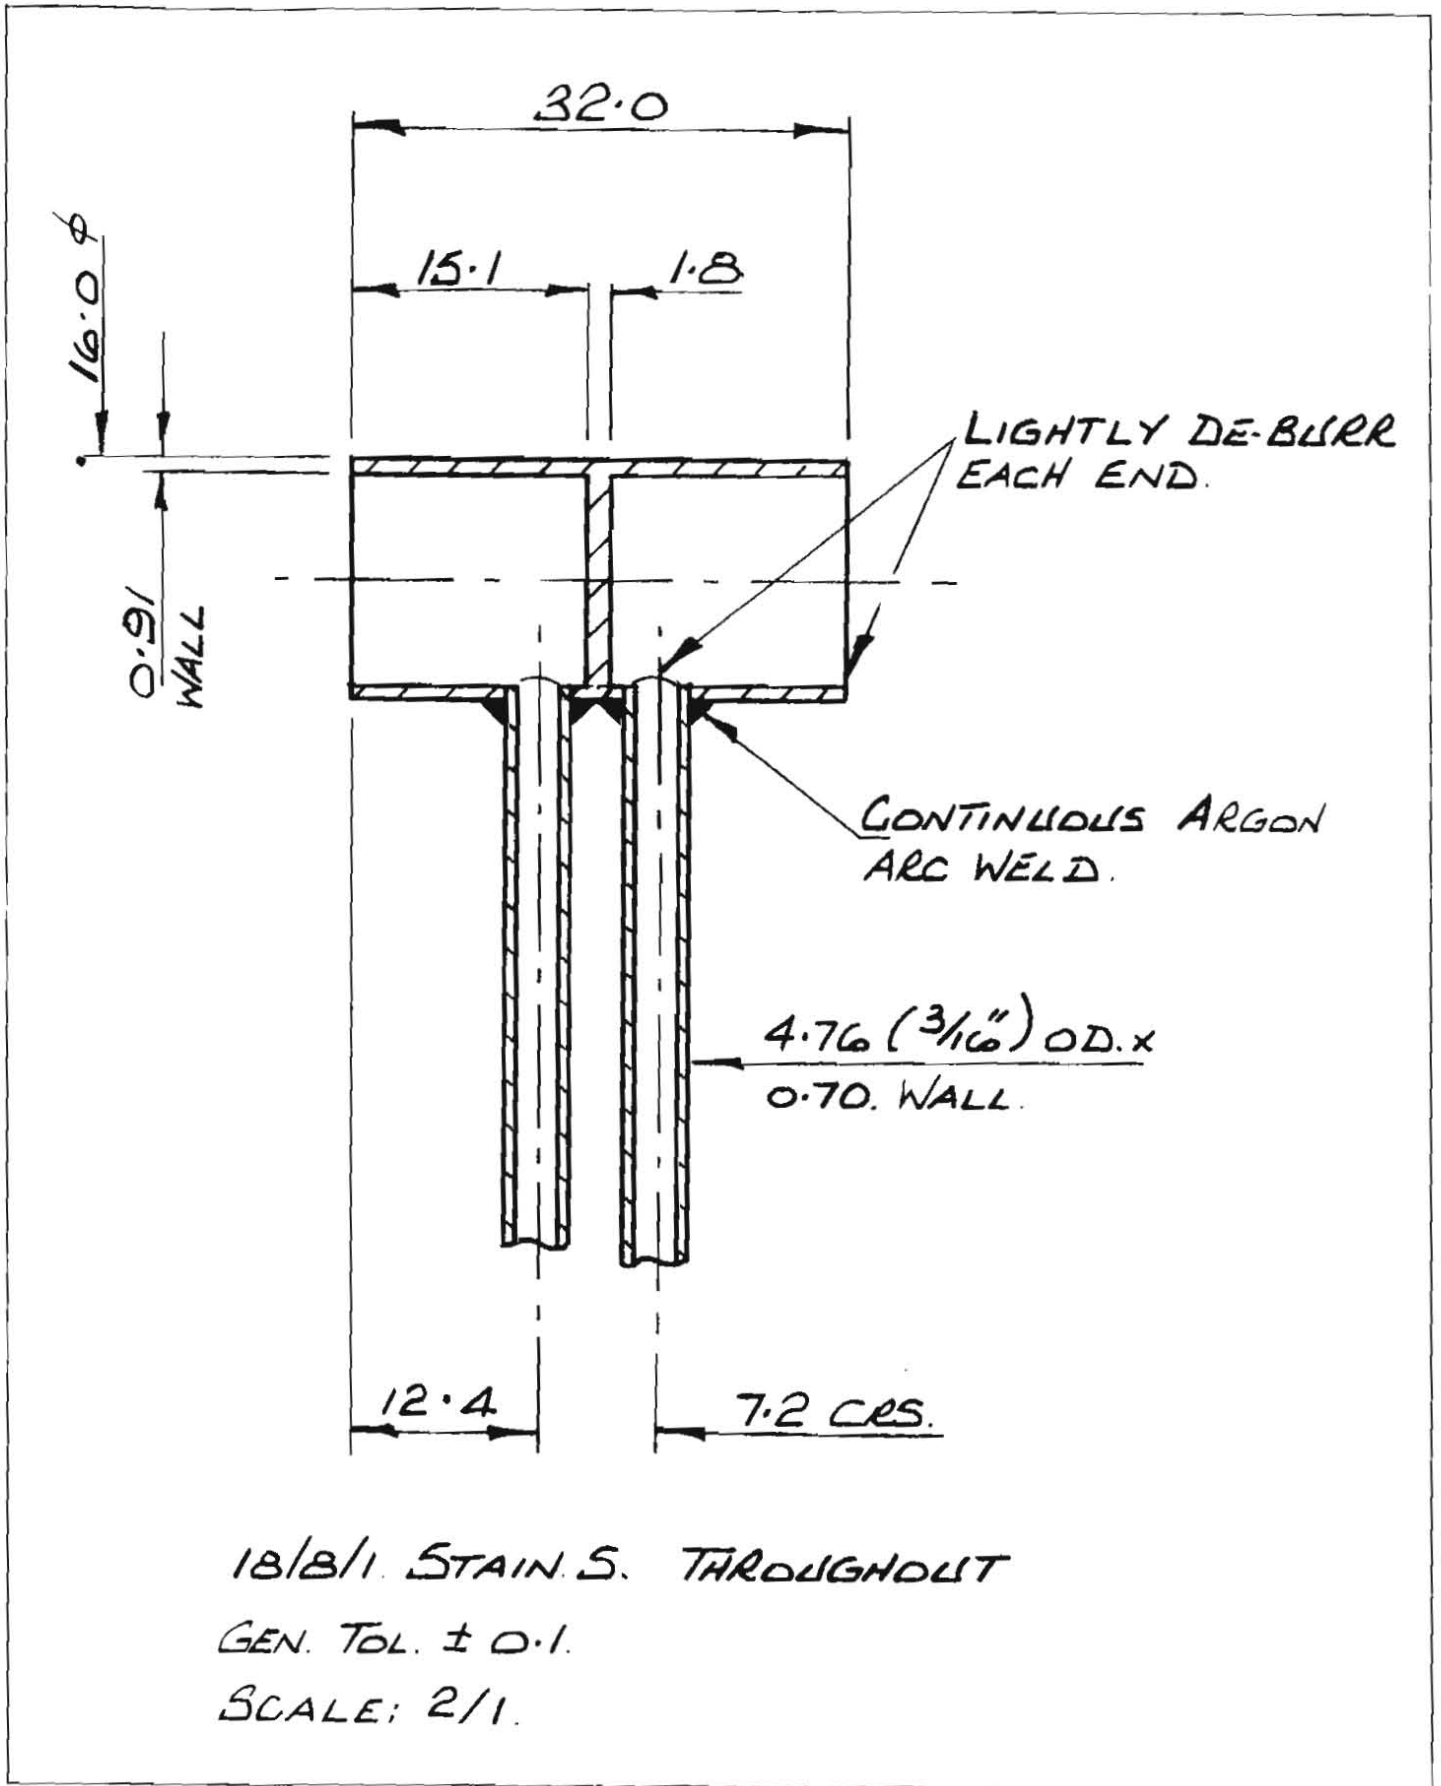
The Mccaffery Probe - Longitudinal Cross Section
